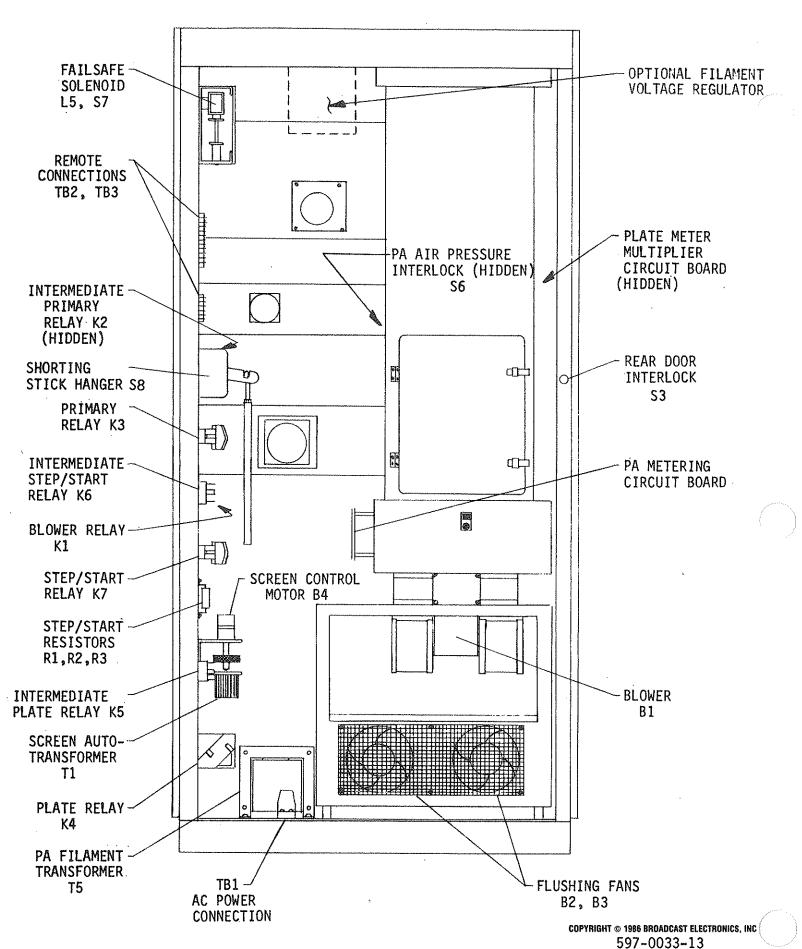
FM-5A/FM-5AS CABINET COMPONENT LOCATOR, REAR
